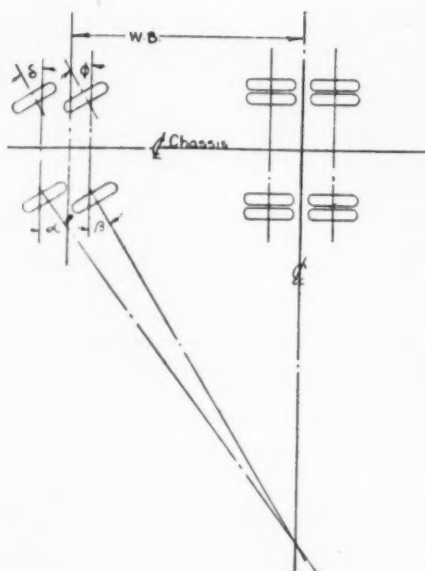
STEERING GEOMETRY OF FOUR-WHEEL TWO-AXLE STEERING ASSEMBLY
